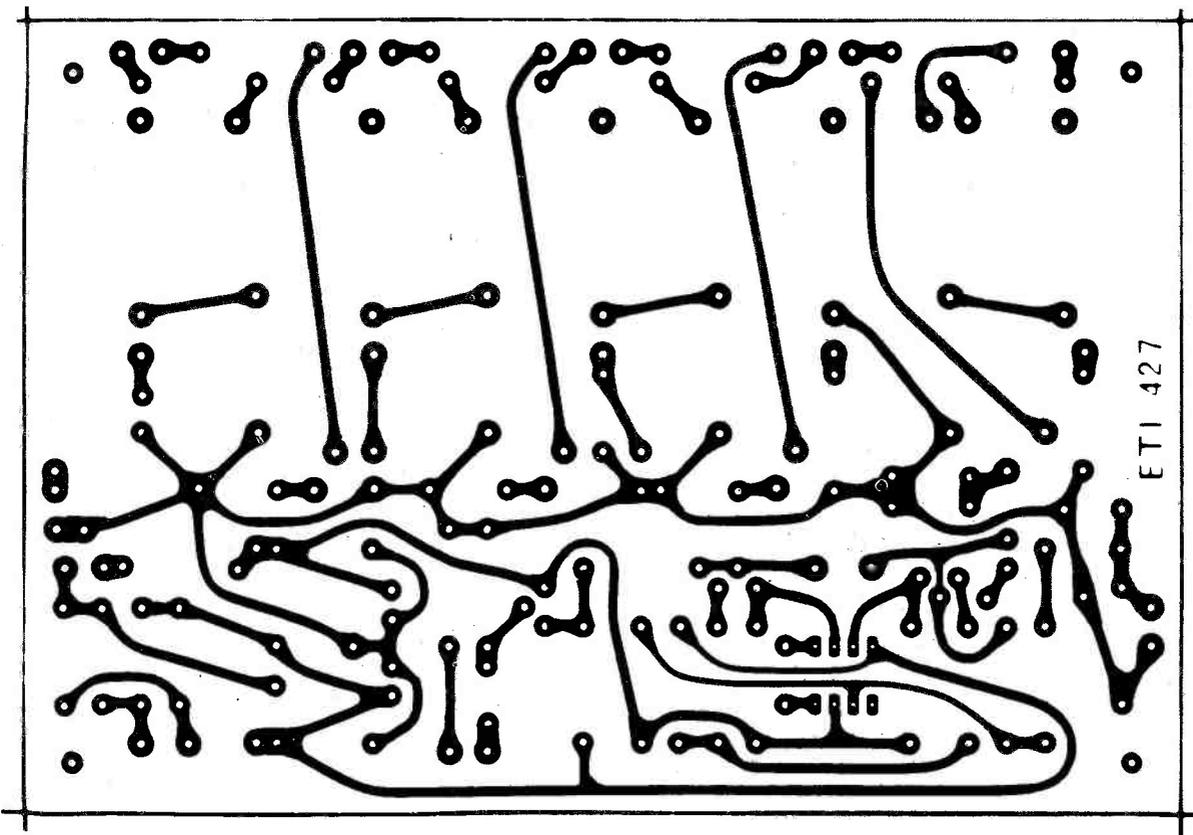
Printed circuit board for the equalizer. Full size 152 x 103 mm.
